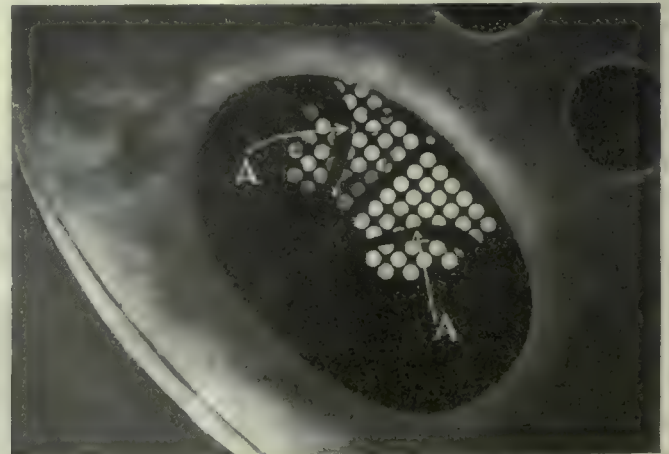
VIEW THROUGH FRONT HEAD MANHOLE BELOW TUBES SHOWING BENT LONGITUDINAL STAYS A.A.
